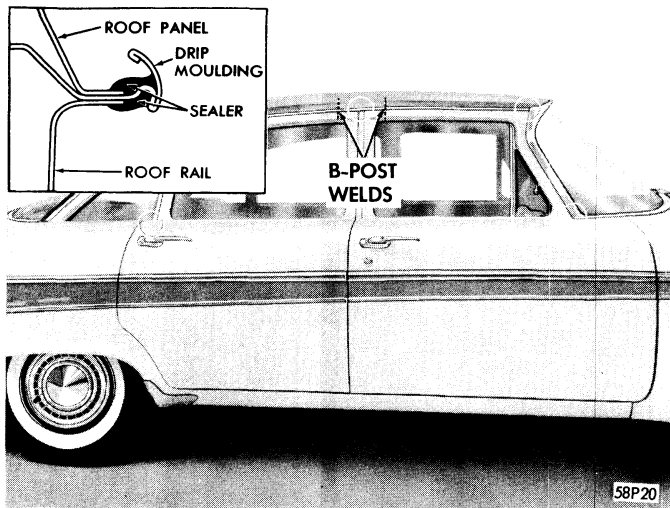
Sealing Drip Mouldings and Pillar Post Welds
